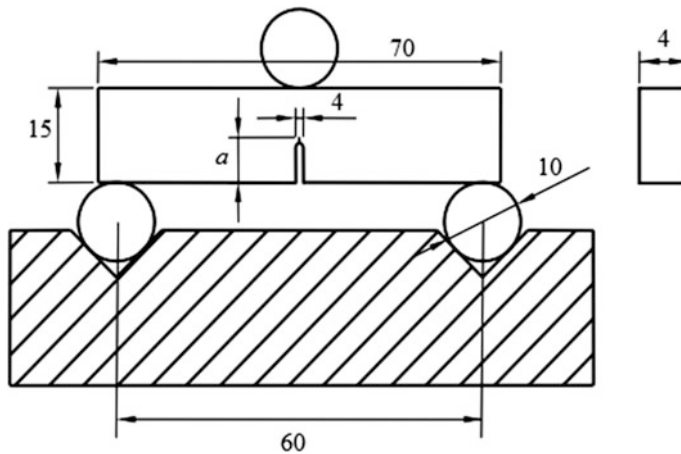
SENB (single edge notch bending) specimen and fixture dimensions for fracture toughness test (dimensions in mm)
